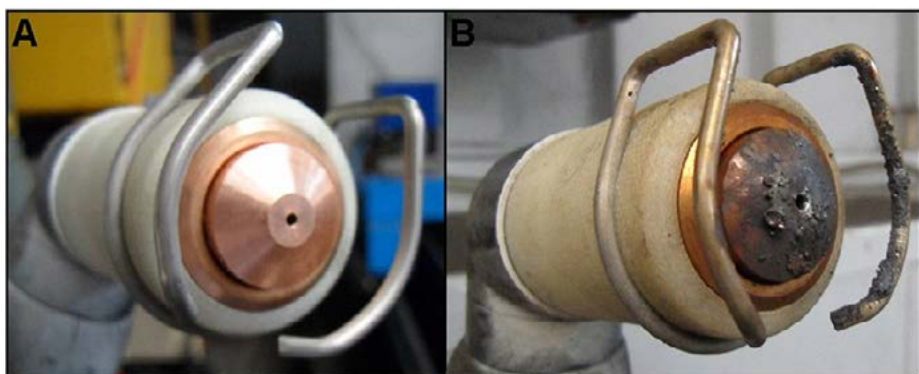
Plasma nozzle, casing and guide without anti-spatter substance: A- before cutting, B- after cutting.
